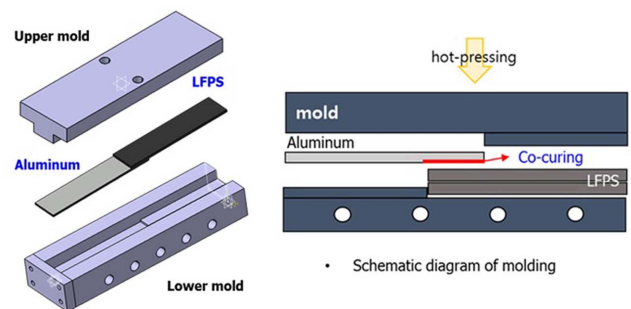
Mold for LFPS-aluminum single lap joint specimens
